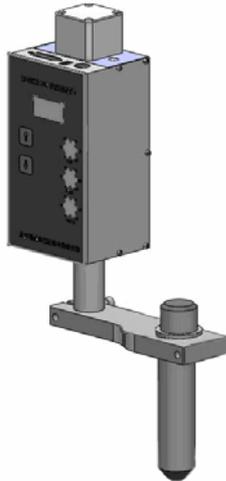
SF-HC30A Flame/Plasma Cutting Torch Height Controller
